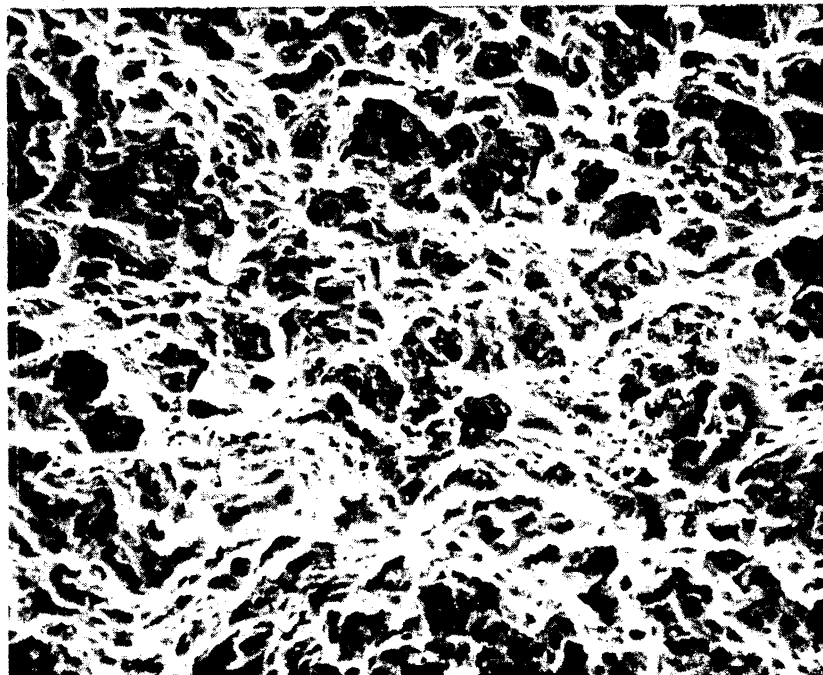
TYPICAL APPEARANCE OF FRACTURE SURFACE
